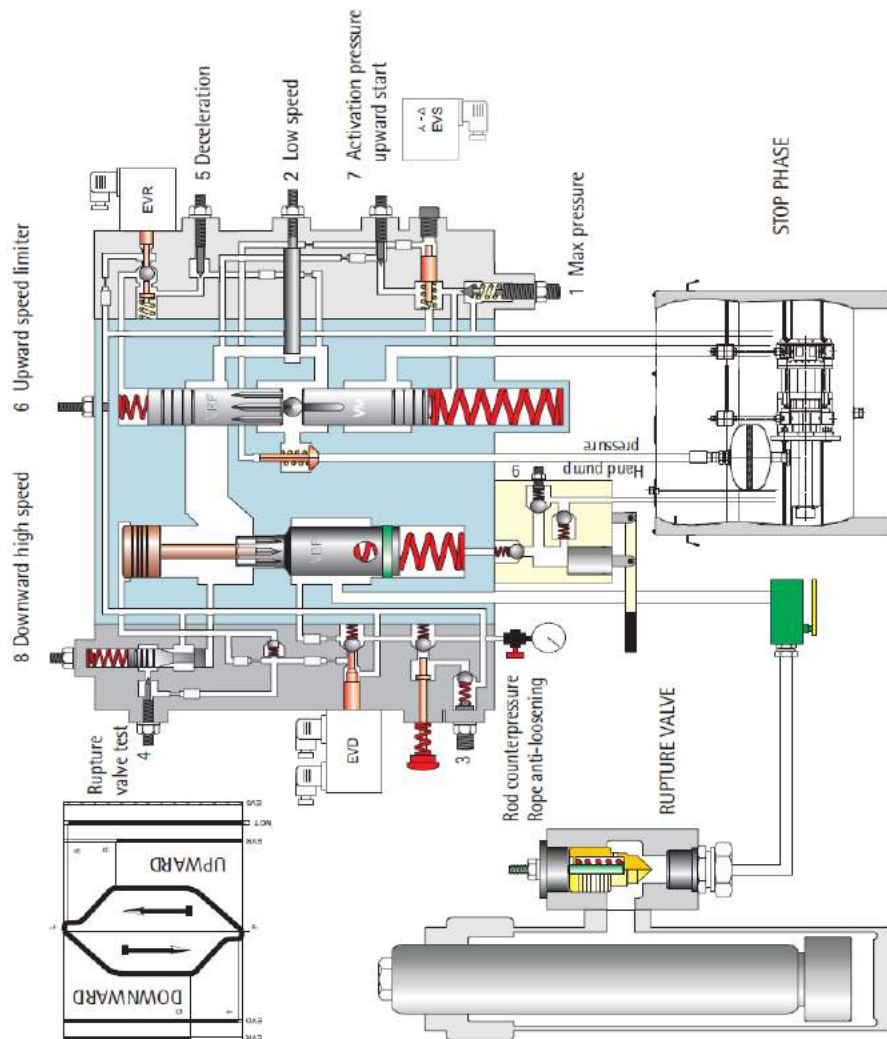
Part of the valve remaining under pressure when the installation is still (hatching)
